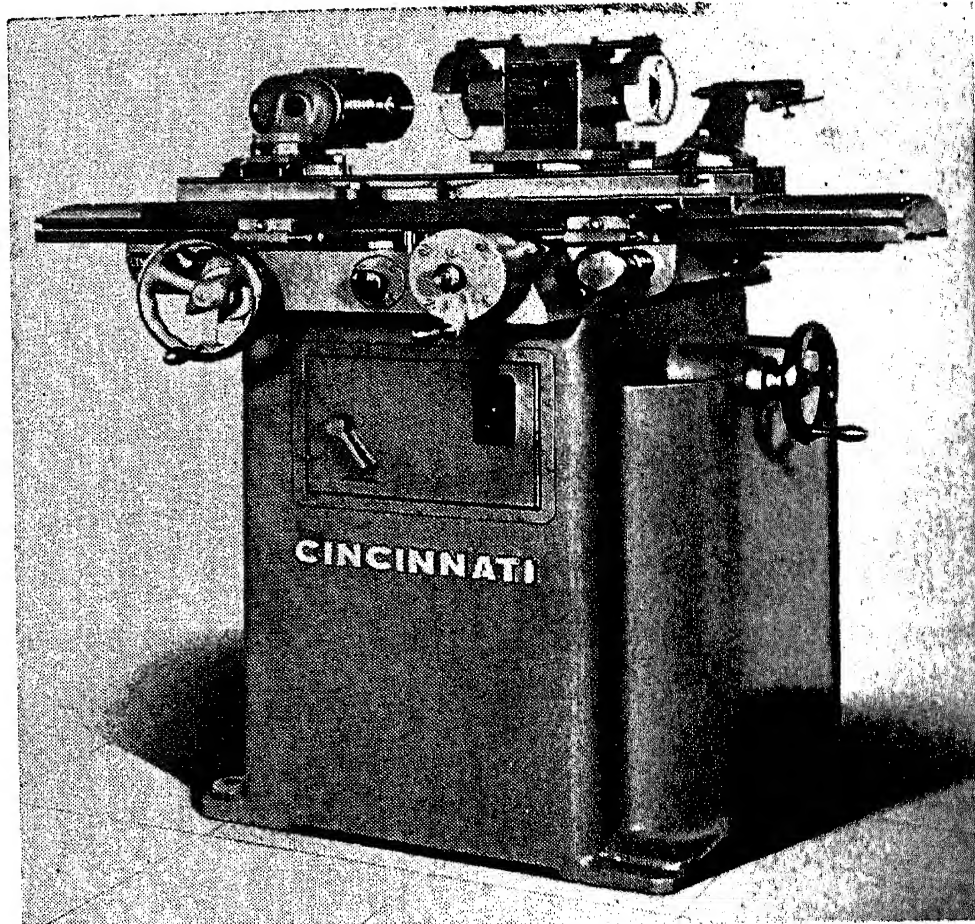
A No. 2 tool and cutter grinder. (Courtesy The Cincinnati Milling Machine Co.)
